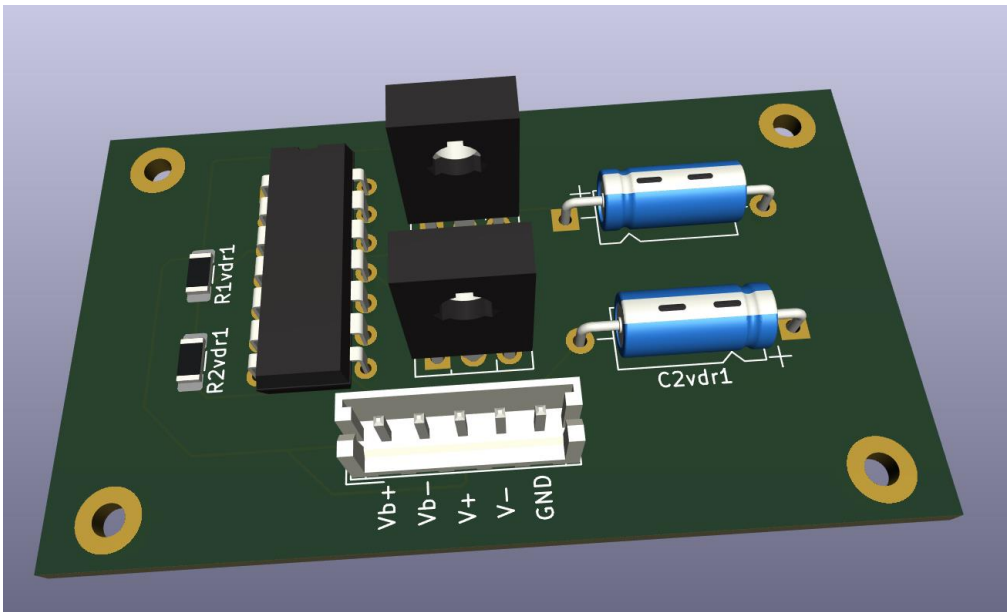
Footprint of Power Supply PCB of UAM
